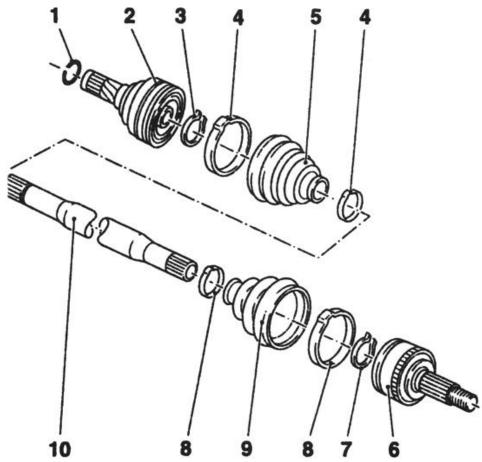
Drive shaft with CV Joints double Compensation:
